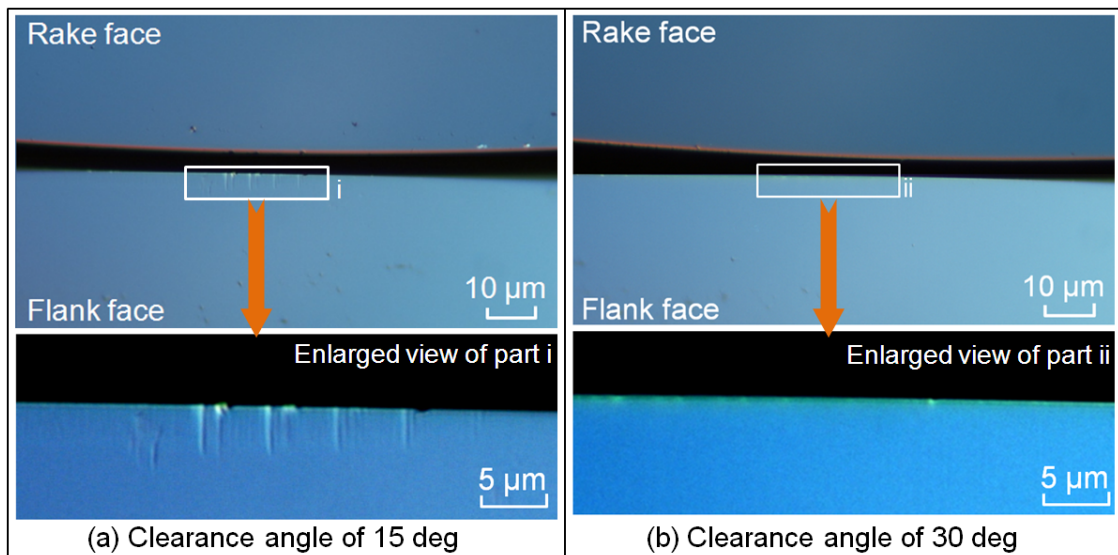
Optical micrographs of tool edge (a) with/ (b) without flank face contact with target shape
